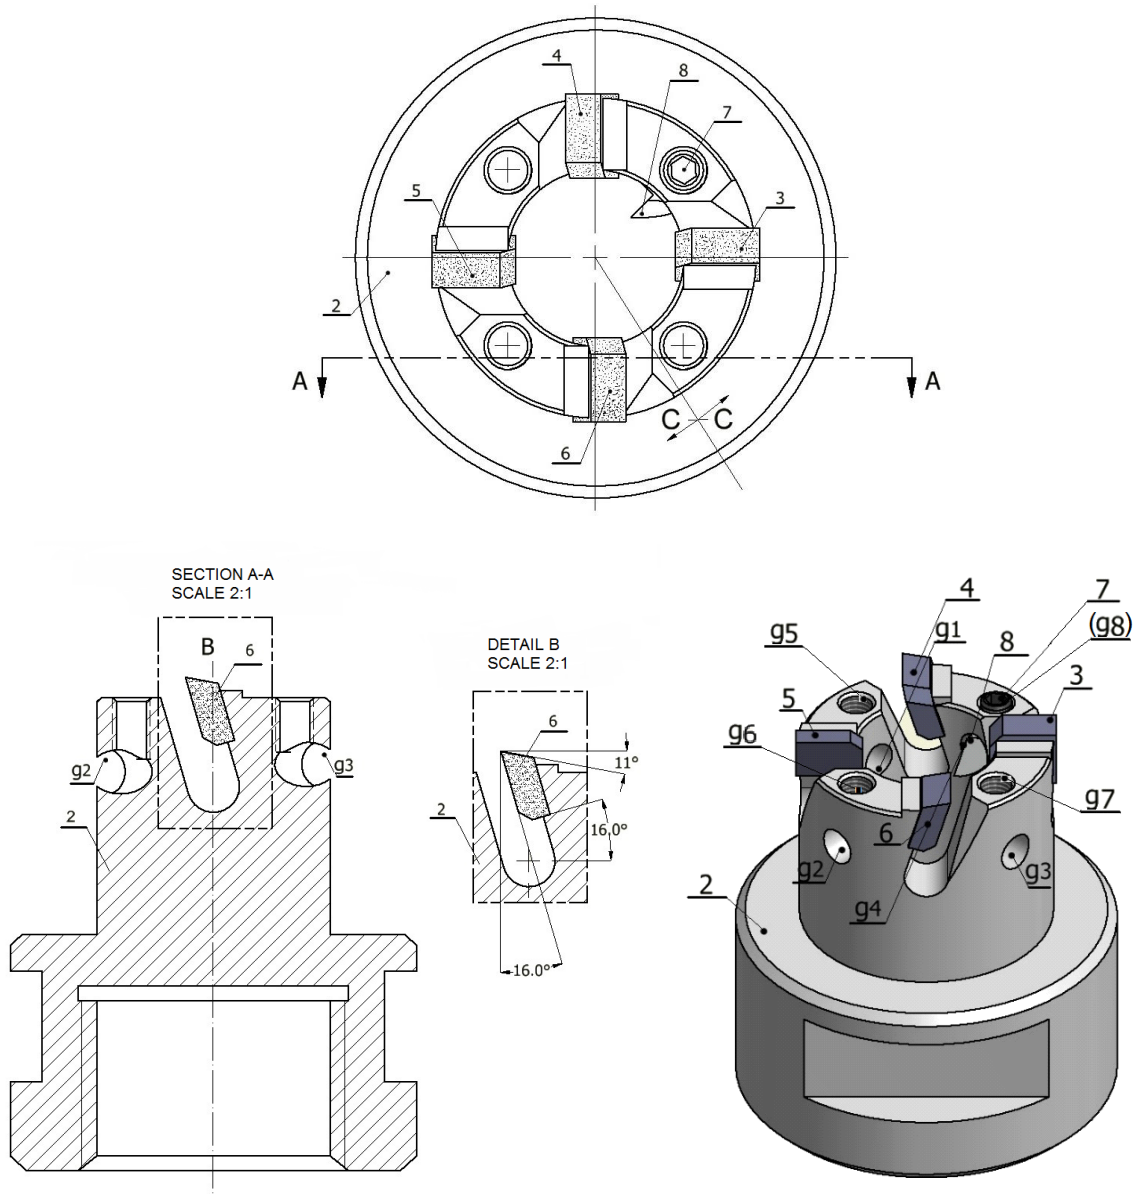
Overall view and section view of the milling cutter used to obtain the wooden plugs made of raw wooden discs with shell.
